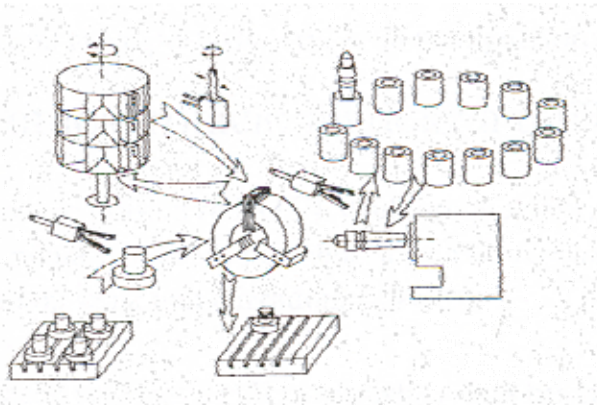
Principle scheme of fixture handling in frame of flexible manufacturing cell
